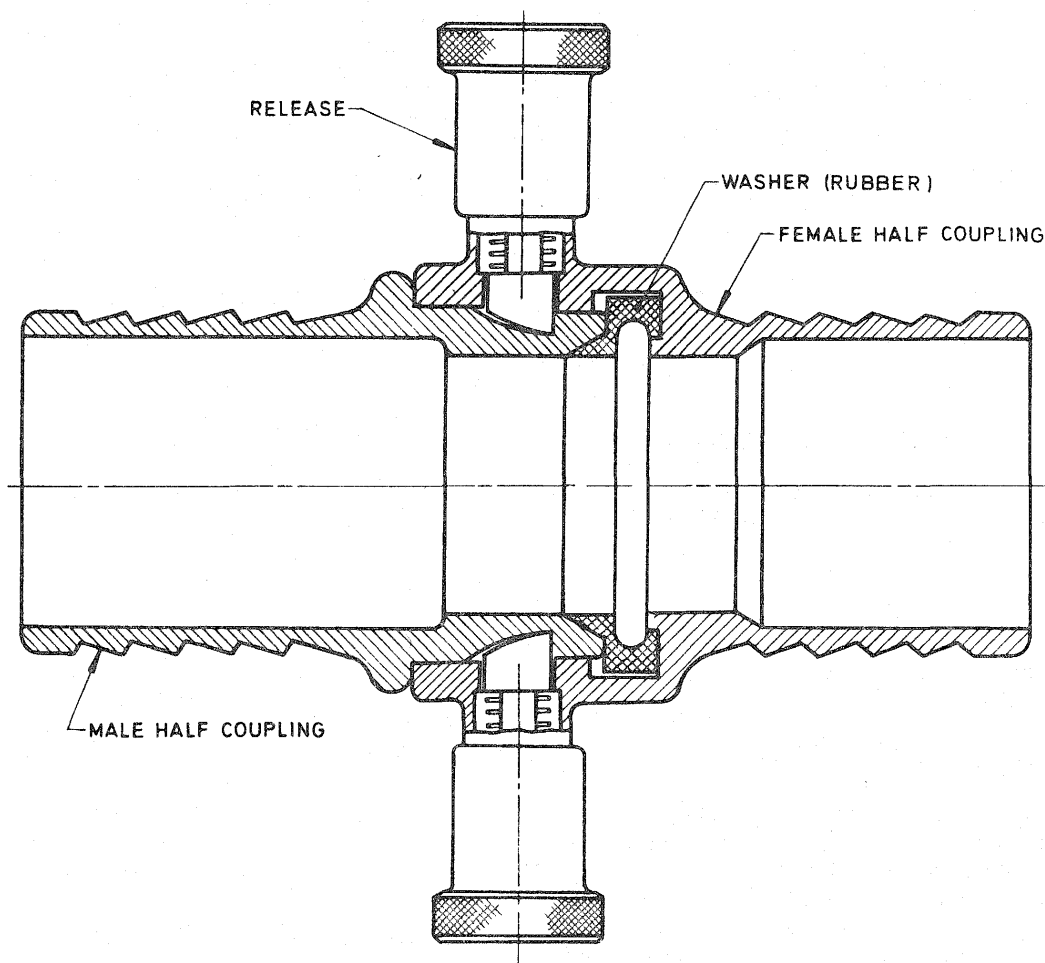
ASSEMBLY OF DELIVERY HOSE COUPLINGS
